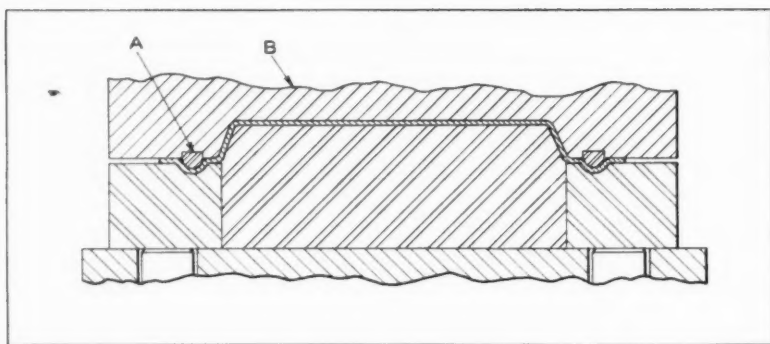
Section of Drawing Die Equipped with a Drawing Bead A
